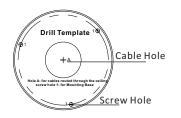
Drill Template 3.Align the base plate with the mounting template and secure it with supplied self-tapping screws.
